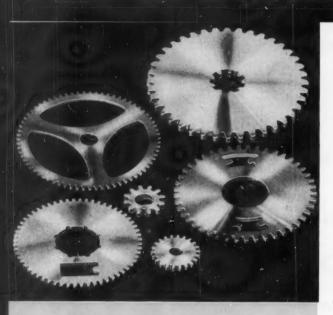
Stamped flat gears may be designed to include lightening cutouts, spring pockets and similar details. Courtesy Winzeler Mfg. and Tool Co.
